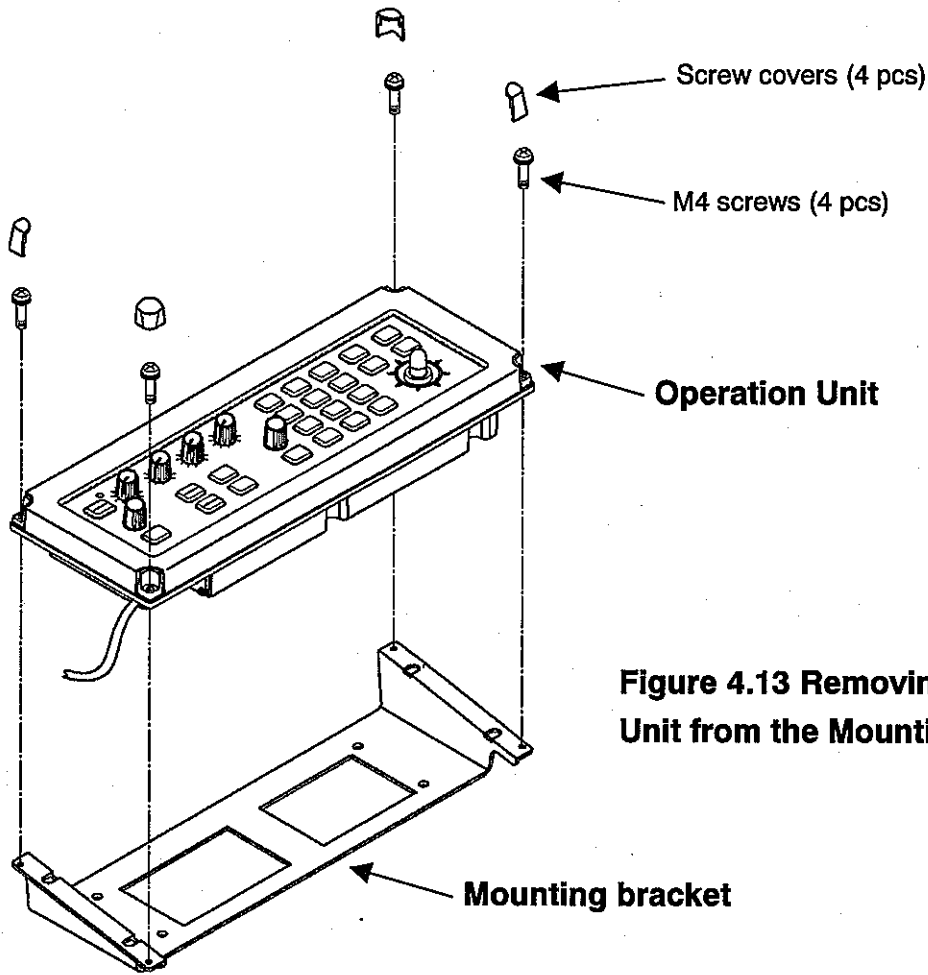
Removing the Operation Unit from the Mounting Bracket
